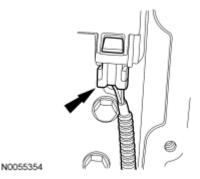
Identifying TR Sensor Electrical Connector Courtesy of FORD MOTOR CO.
